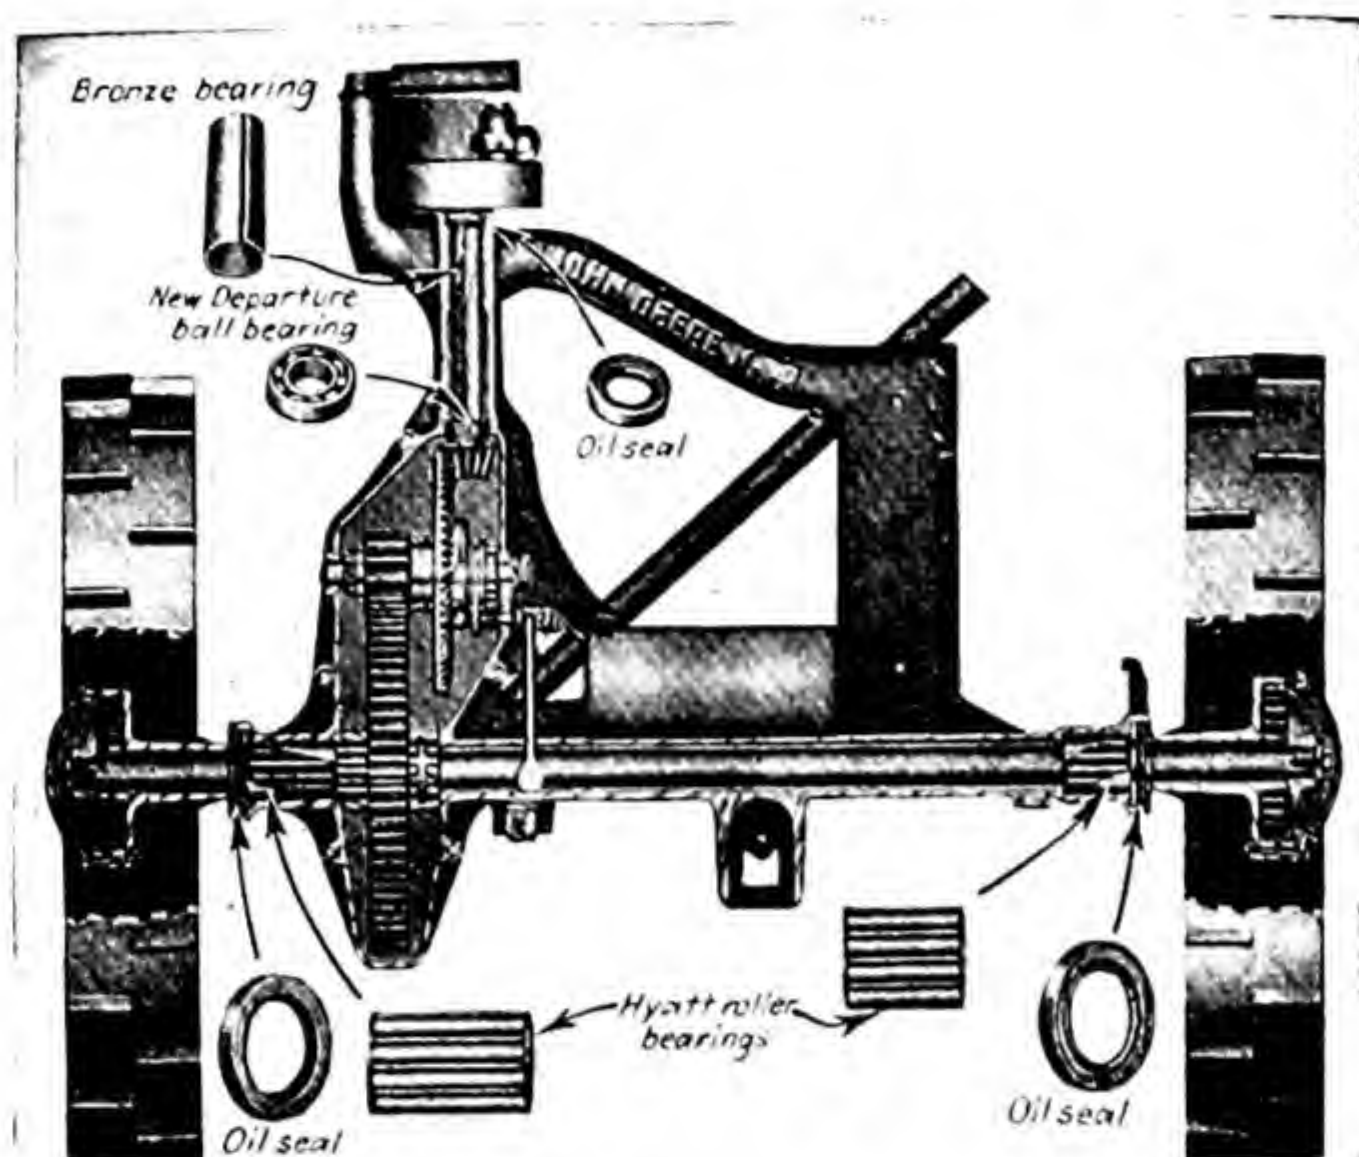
Mower frame showing enclosed gears and automatic lubrication of main operating parts. Note bearing and oil seals on axle line and pitman shaft.
